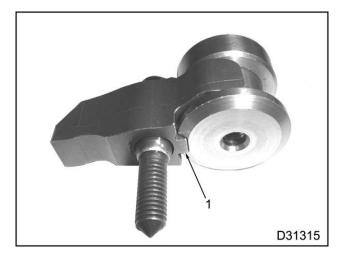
Hold Down Clamp and Valve Spring Compressor Base
